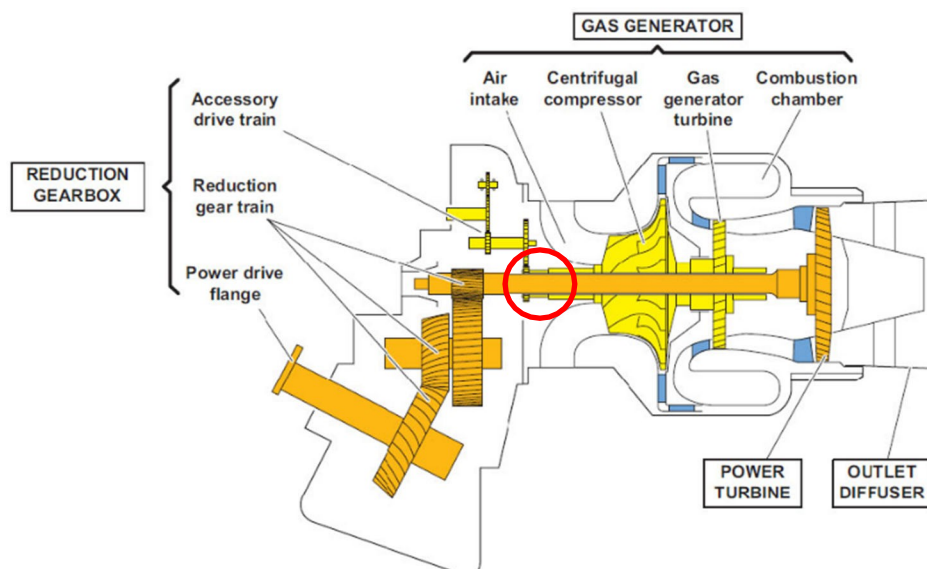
Schematic representation of an Arrius 2B2 shaft engine. The *gas generator* is shown in yellow, the *power turbine* and *reduction gearbox* in orange. The drive gear of the accessory drive train is circled in red. Source: Safran Helicopter Engines
